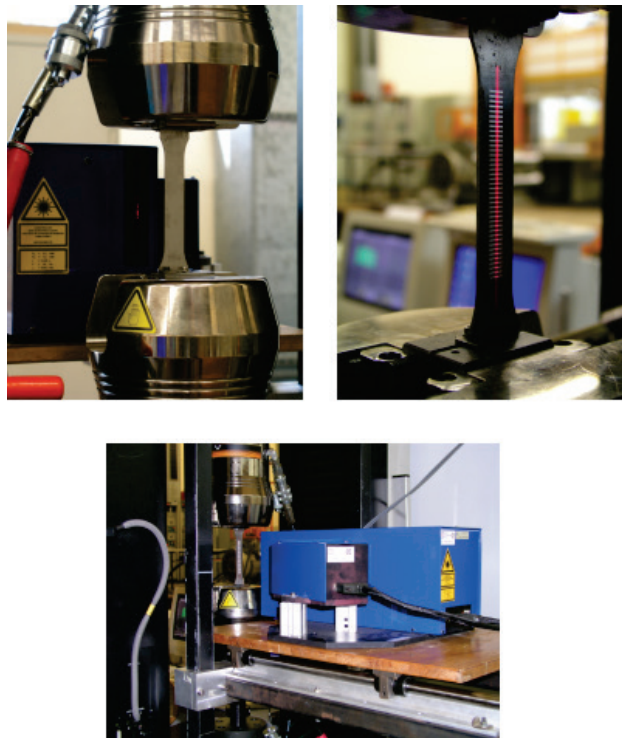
Local strain measurements of FSW-joints using a laser extensometer. TiO_2 stripes are attached to the surface of the tensile test specimen. The deformation in each welding zone is determined between two black/white regions.
